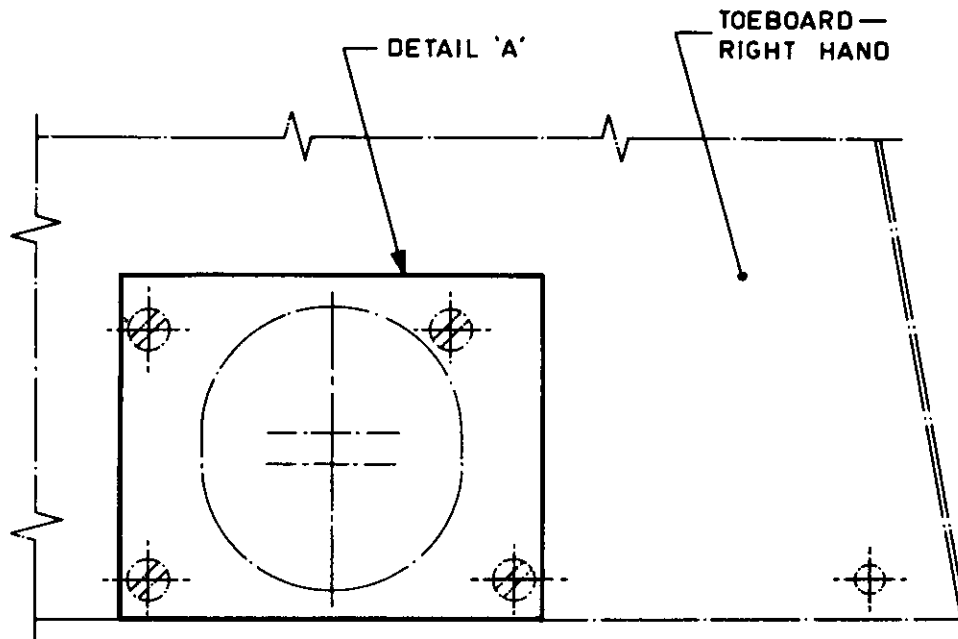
LOCATING OF TREADLE VALVE ORIFICE BLANKING PLATE
